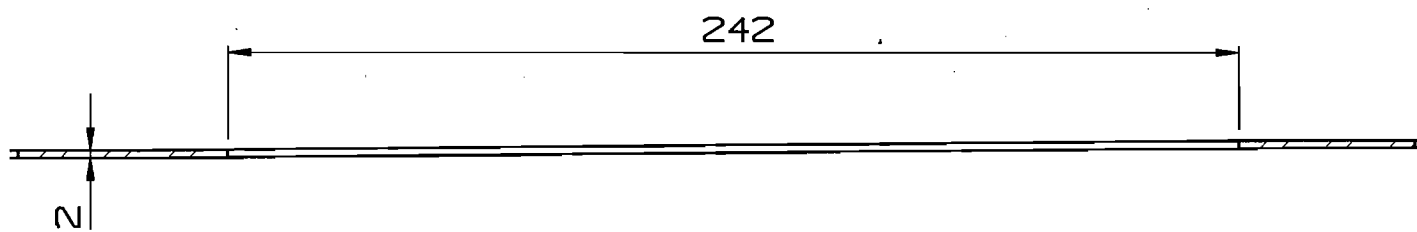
Dimension of Weld Pad for Chemical analysis
